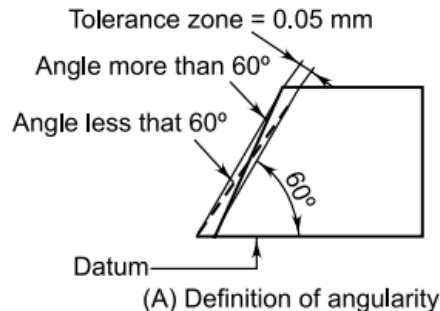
Indicating Angularity of Surface on a Drawing
